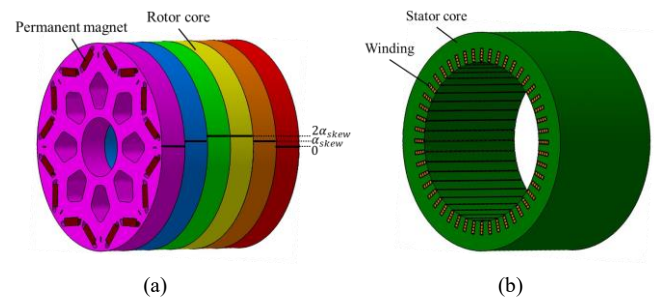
Geometric model of IPMSM. (a) Rotor with segmented skewed poles. (b) Stator.
